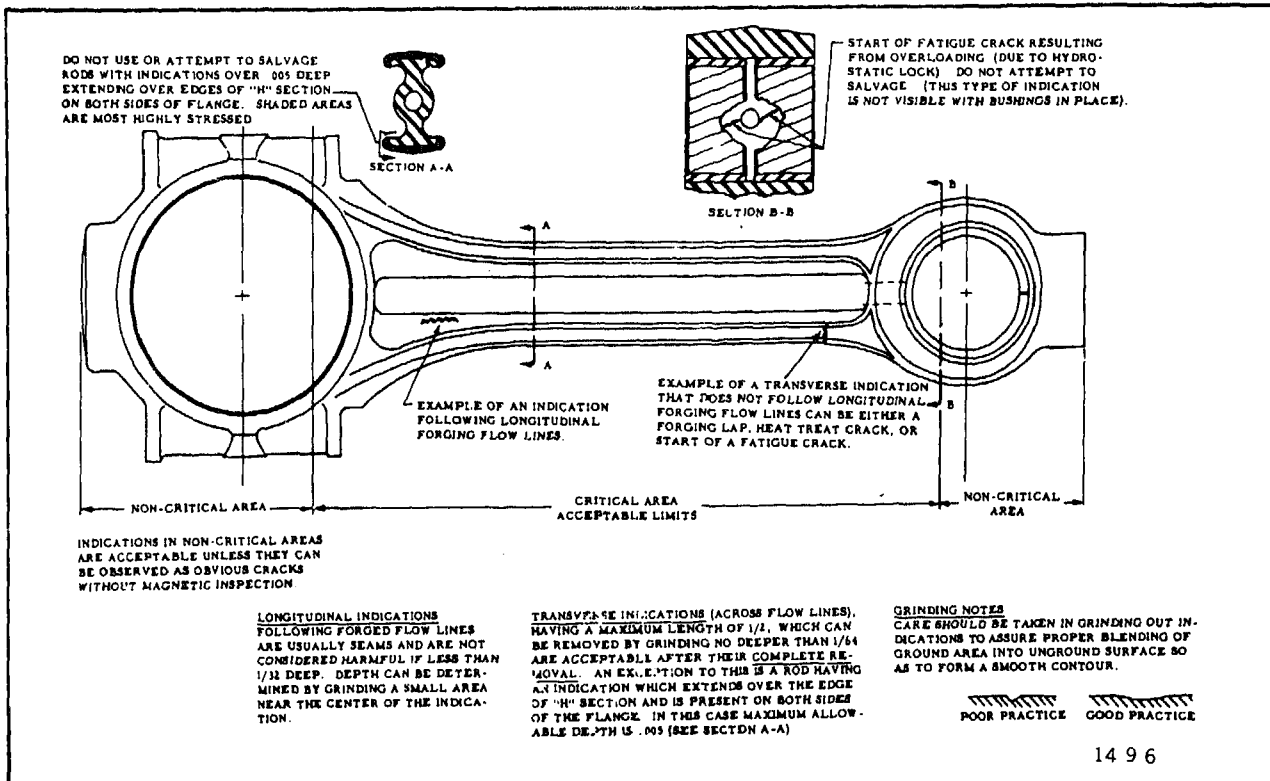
Magnetic Particle Inspection Limits for Connecting Rod
